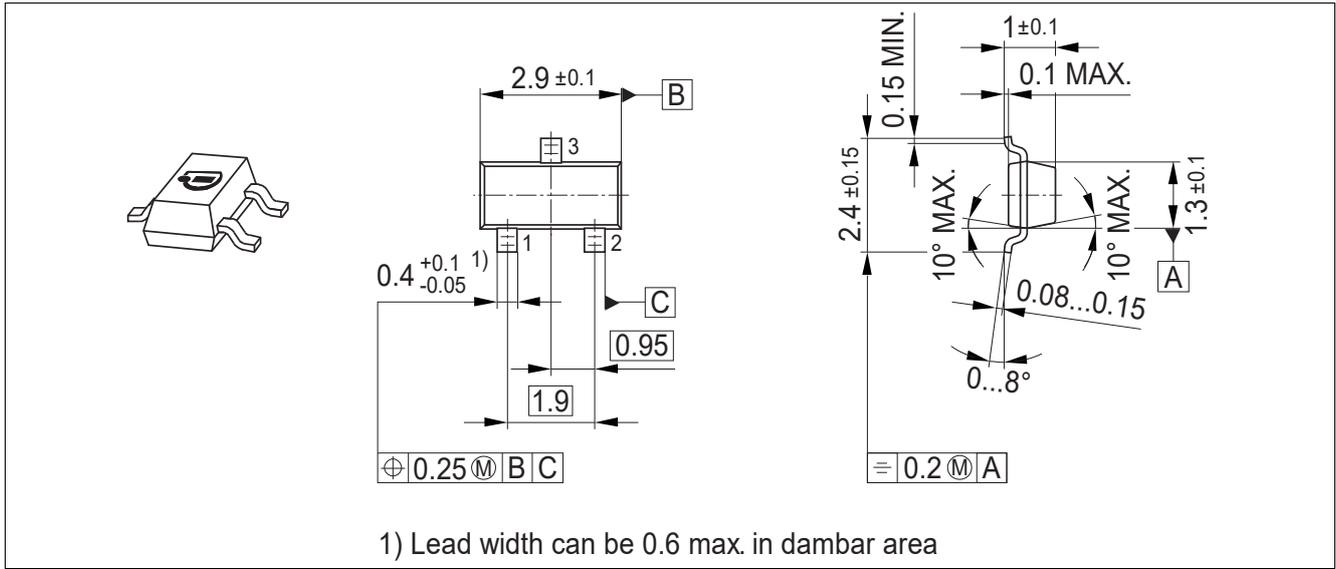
PG-SOT23-3-15 package outline (all dimensions in mm)
